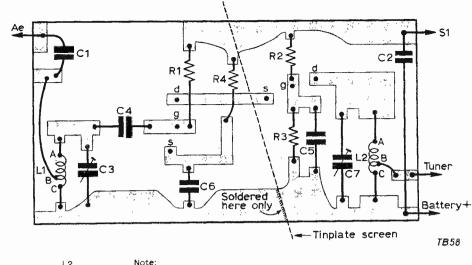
Printed circuit board, for the circuit of Fig. 2, shown actual size.
